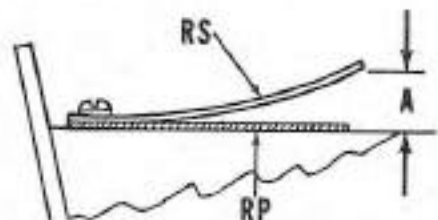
Cross sectional view of reed-type inlet valve. Reed petal (RP) should make full contact with plate. Reed stop (RS) adjustment should not be changed. Clearance (A) should be $\frac{1}{4}$ inch.
